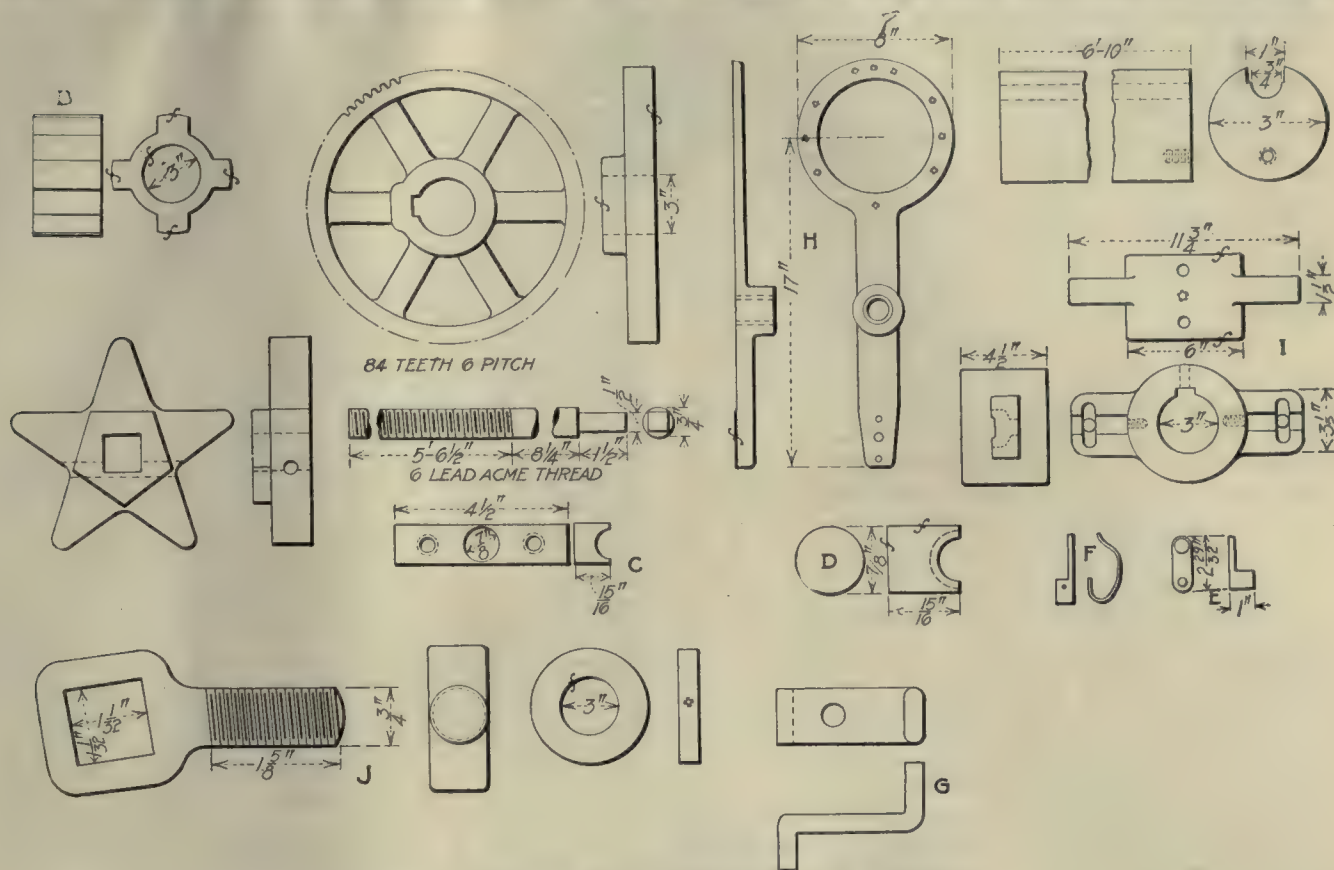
DETAILS OF CYLINDER-BORING MACHINE
